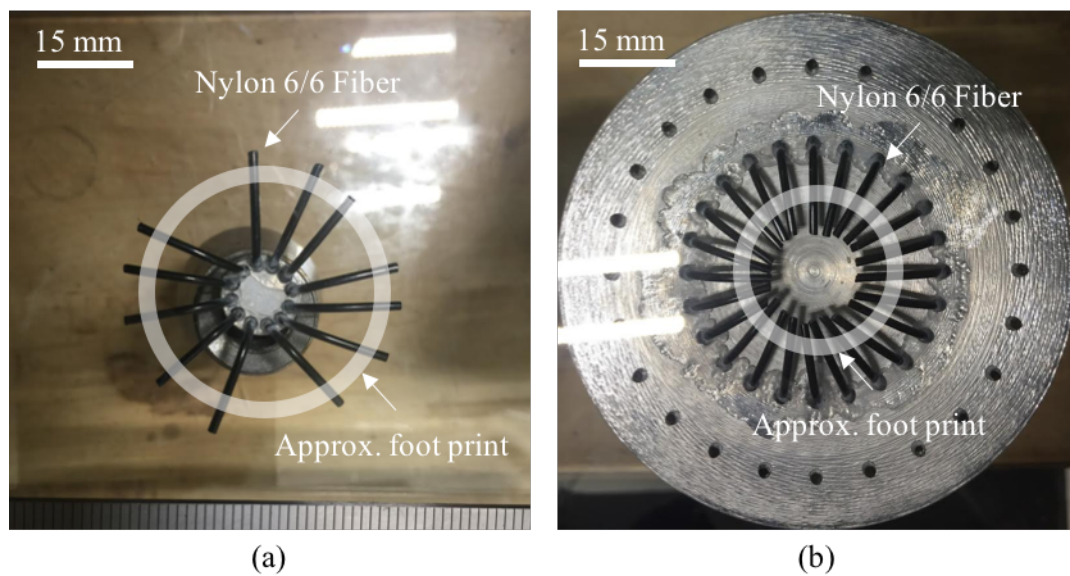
View from bottom of the engaged tools; (a) FT- tool (b) FT-3 tool
